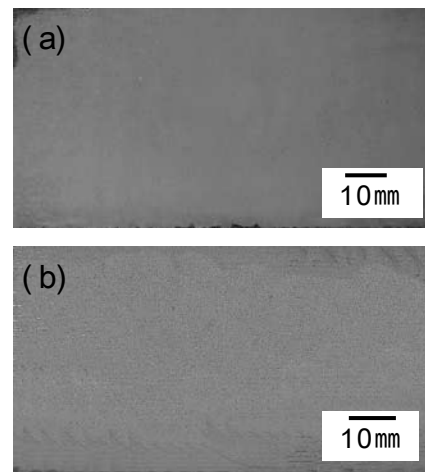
Result of the color check on cold rolled surface of the strip cast using the grooved rolls
